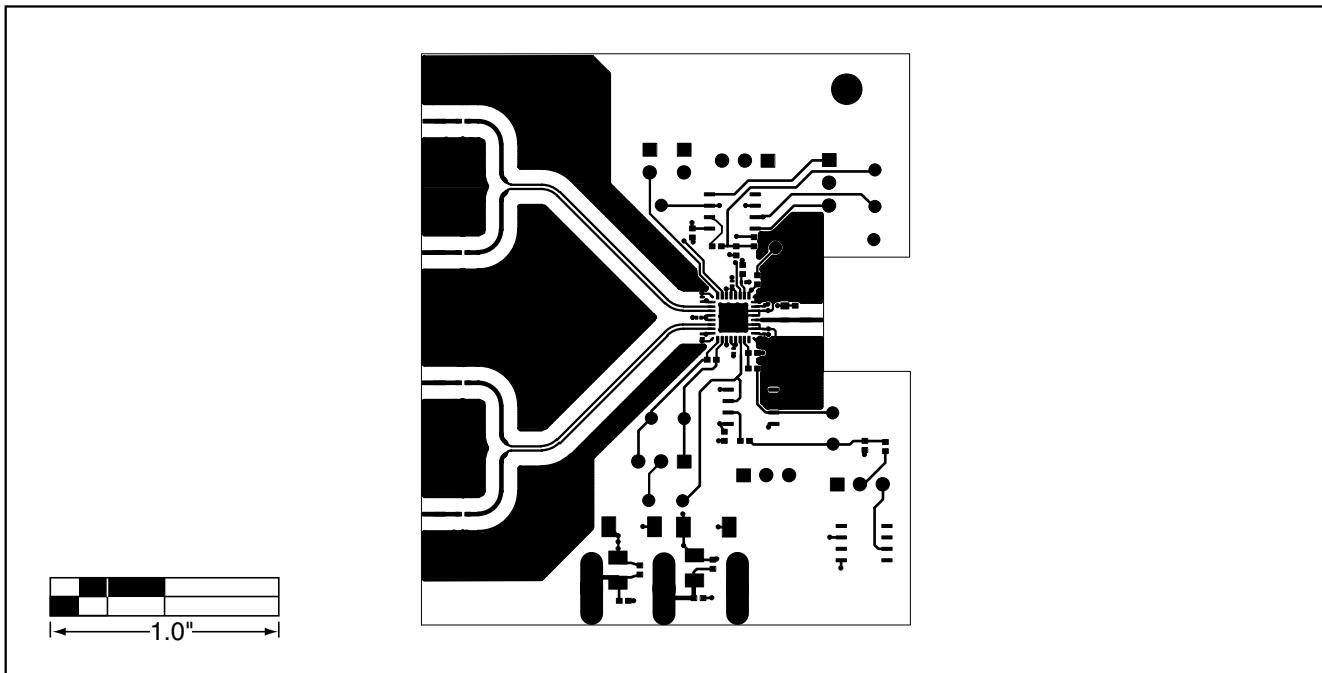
MAX3935 EV Kit PC Board Layout—Component Side
